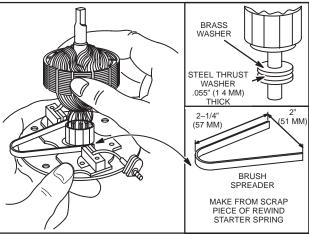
ASSEMBLING ARMATURE TO END CAP
